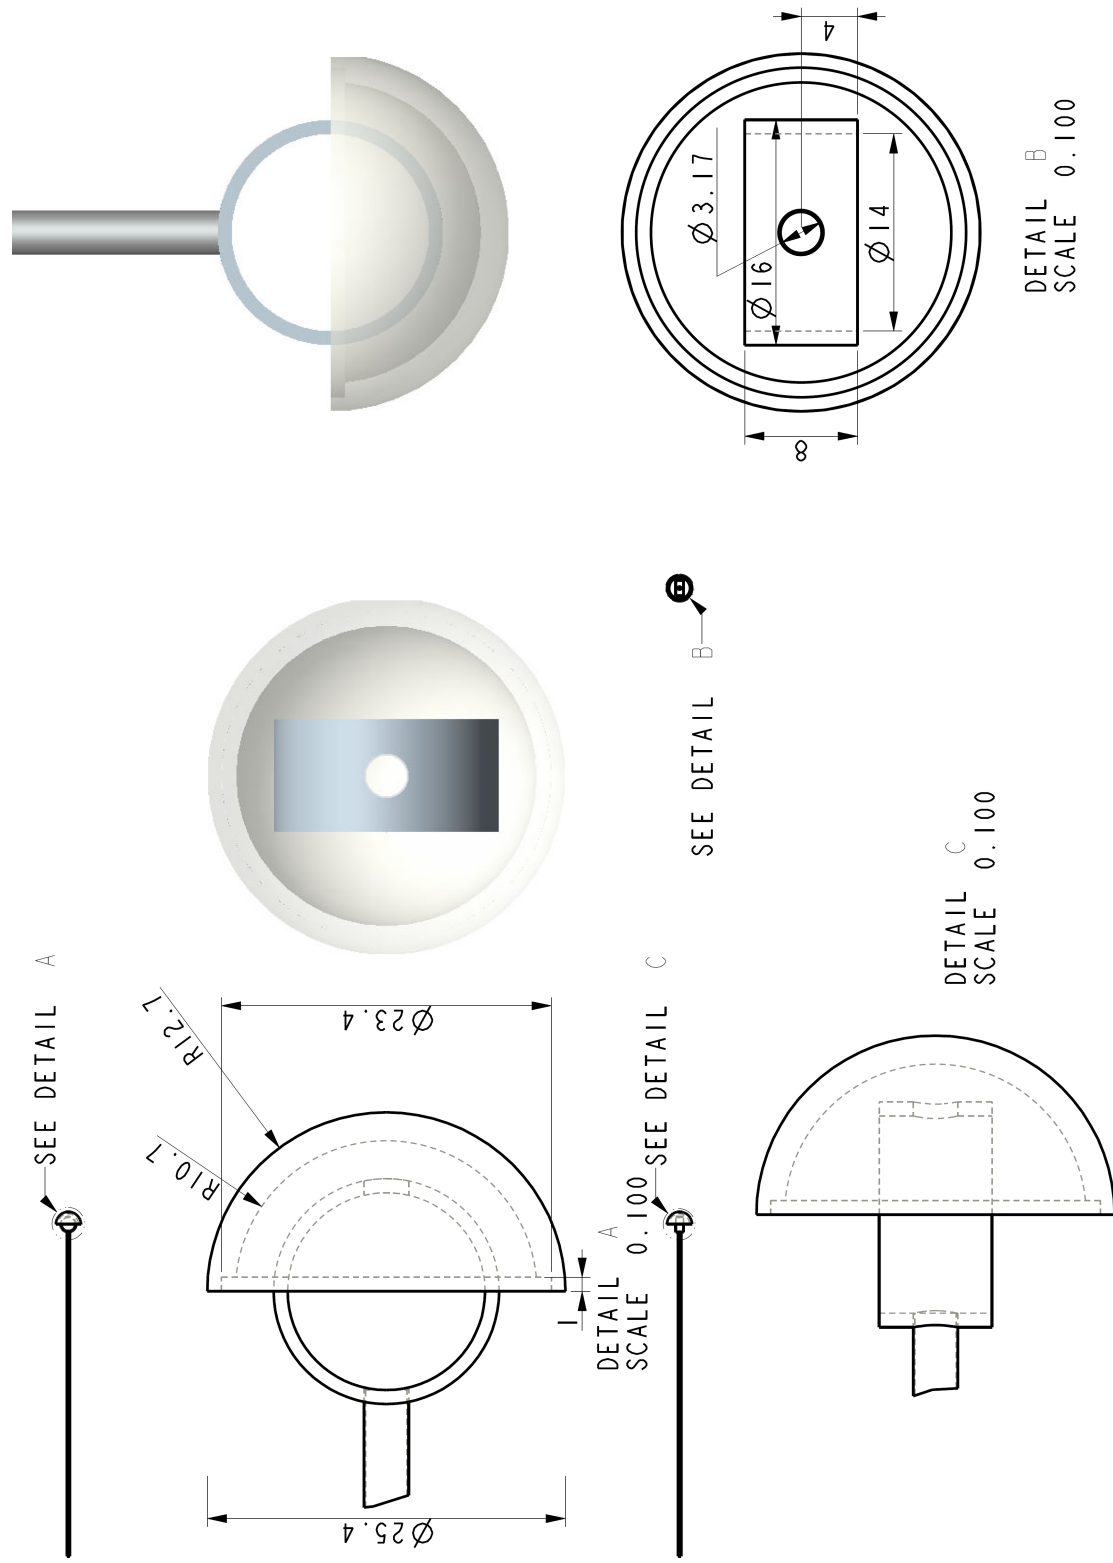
Dimensions of lower half of ball, proving-ring load cell and inner shaft.
